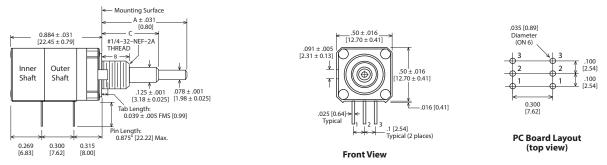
SHA-31: Concentric Shafts, B22, 3 Potentiometer(s) or RS + MP, 3/8" Bushing Section 1, 2 & 3 Potentiometers or RS on Outer Shaft Section 4 Momentary Push Switch on Inner Shaft
